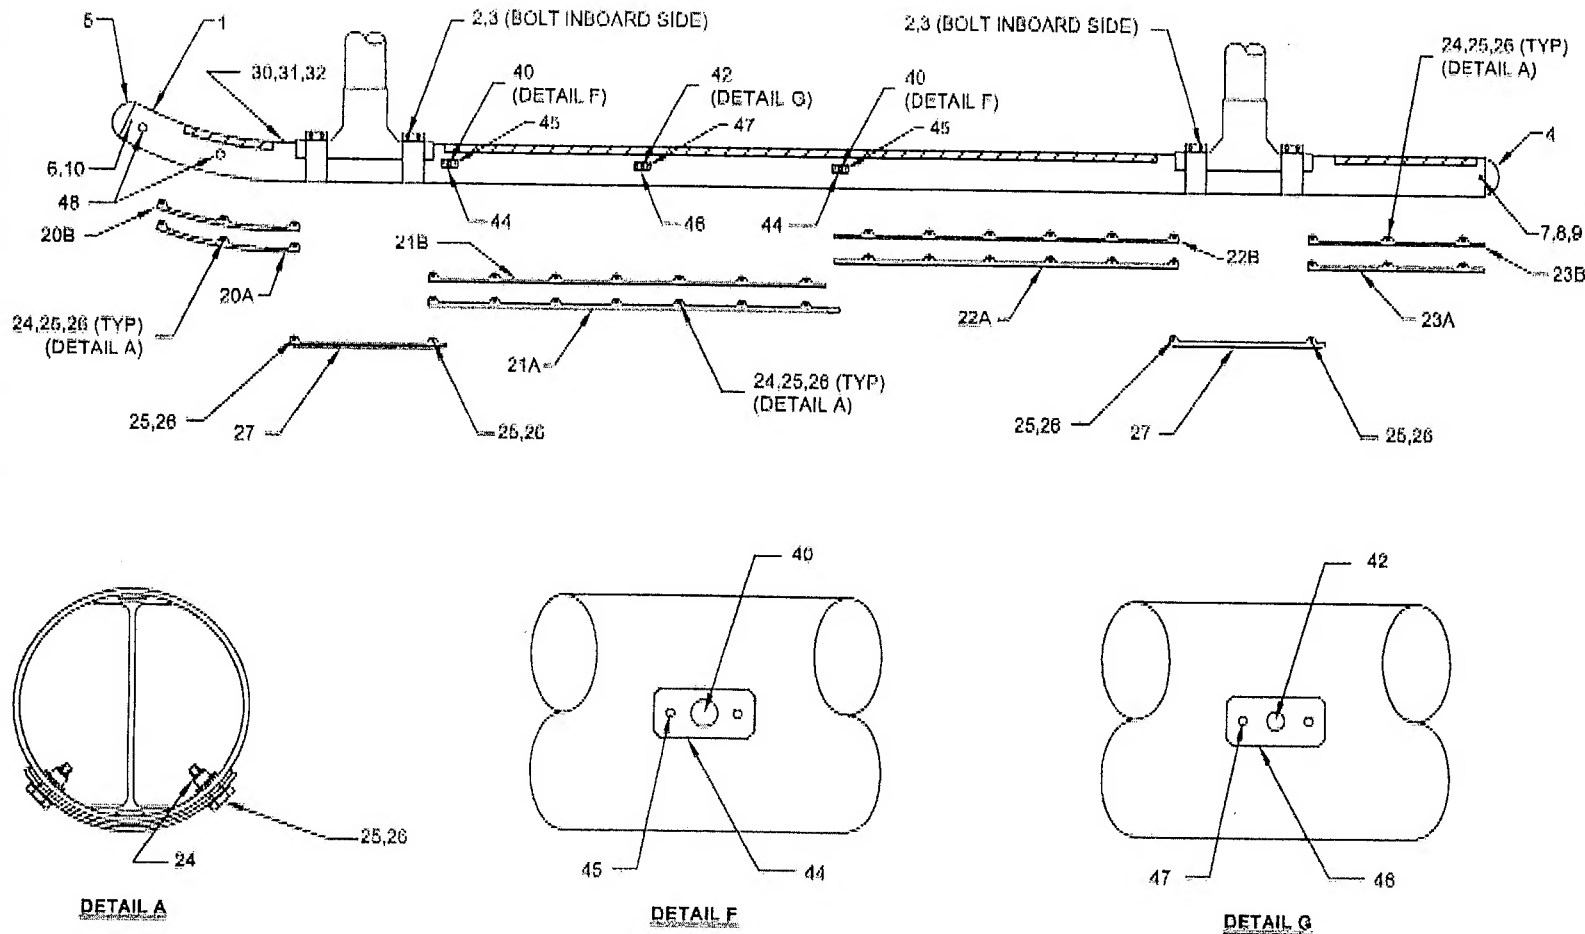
D135-751-011 SKIDTUBE INSTALLATION
